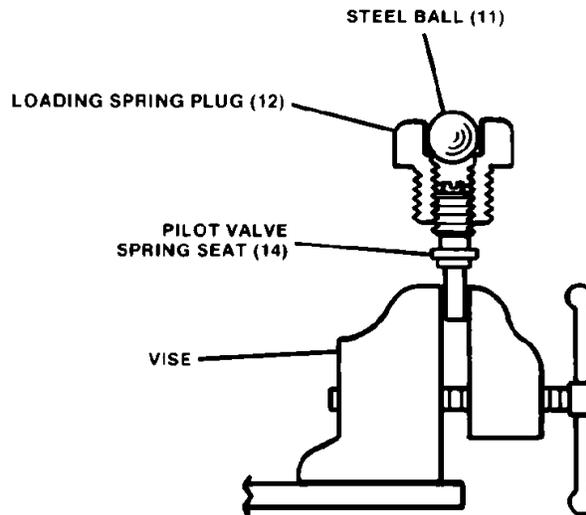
Removing Pilot Valve Spring Seat (14) and Steel Ball (11) from Loading Spring Plug (12)
